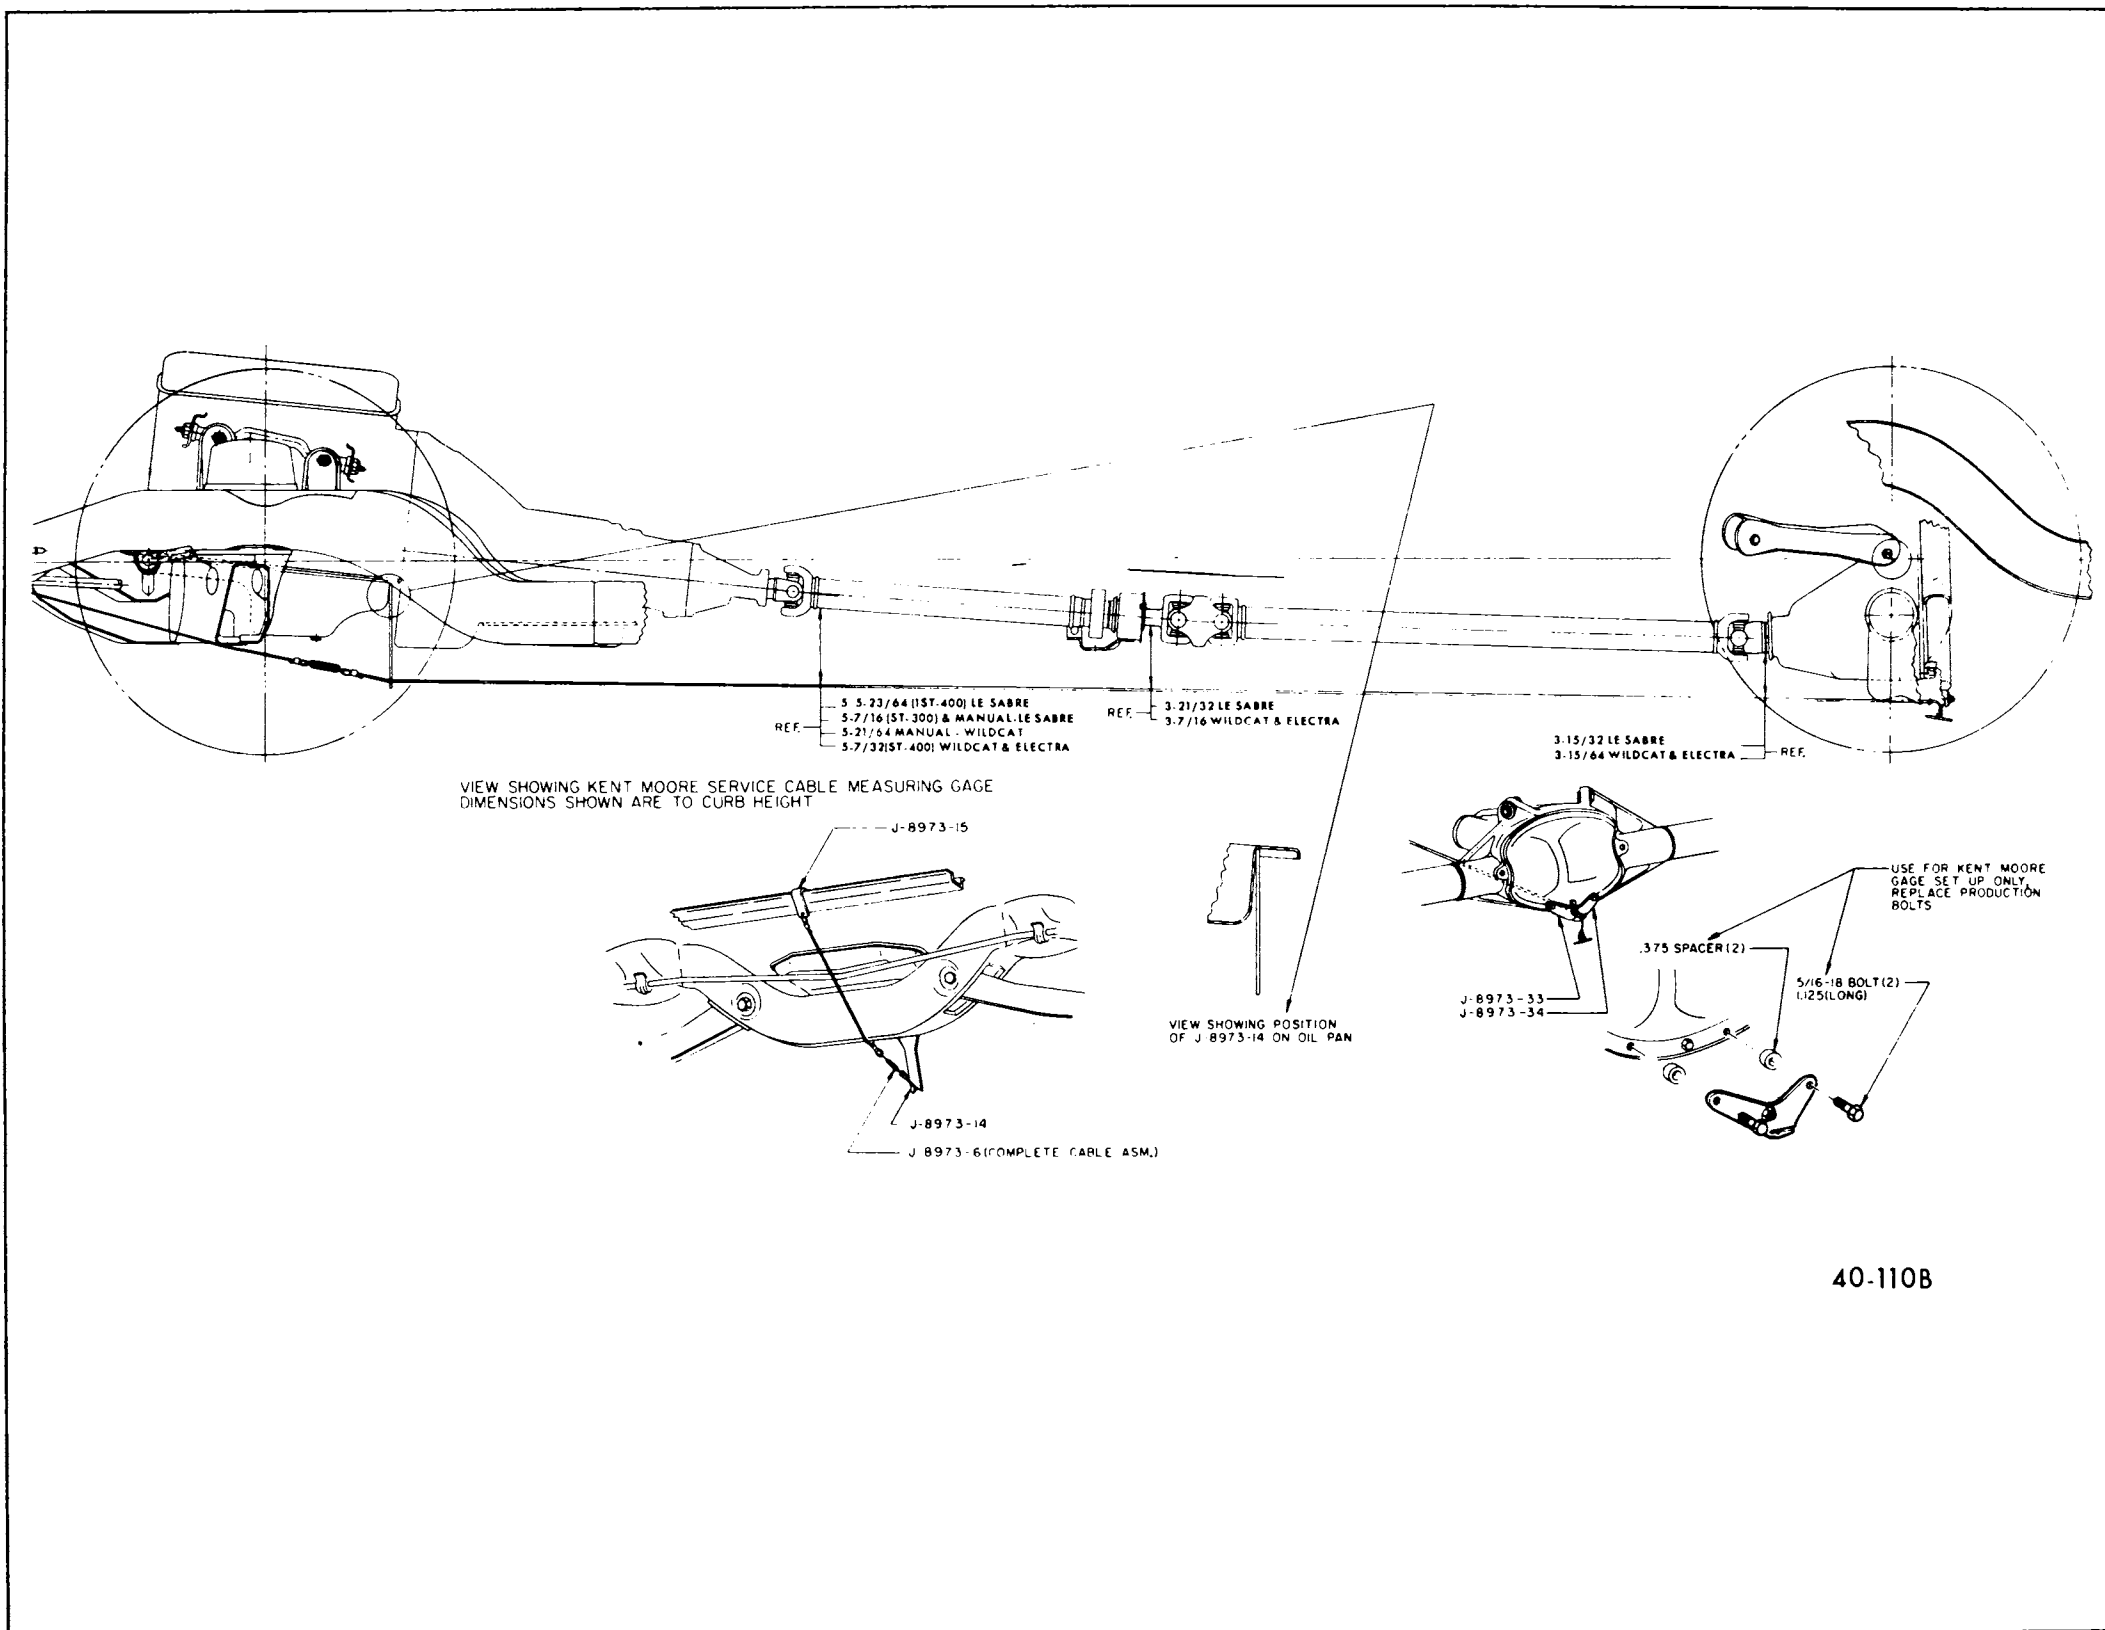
Checking Universal Joint Angles 45-46-48000
